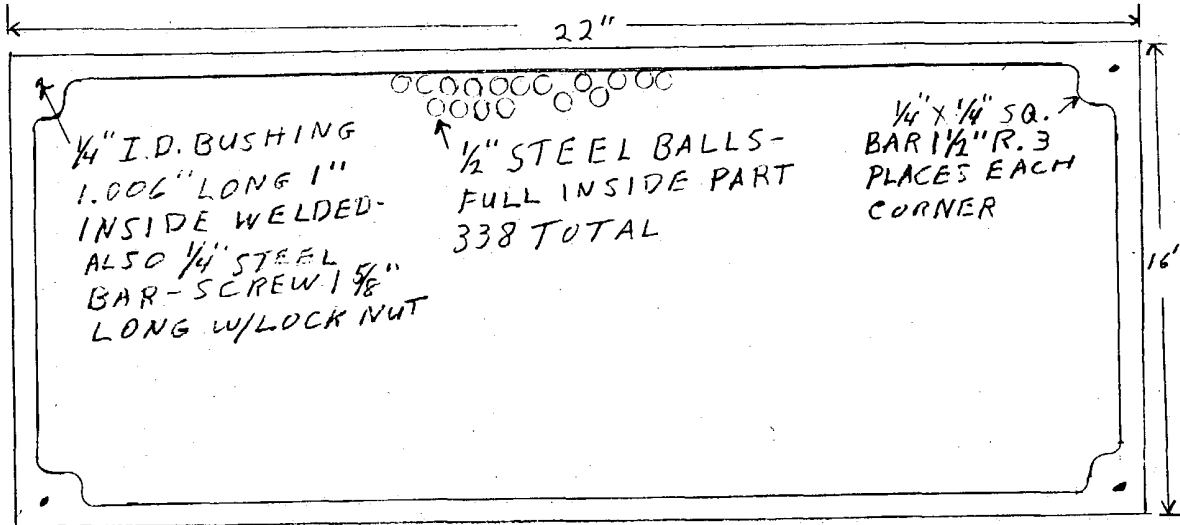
Bottom Plate 16" x 22" 4130 steel plate
